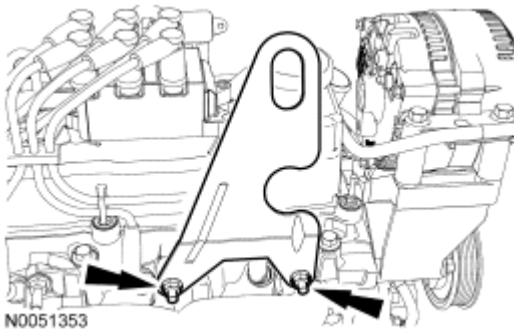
Locating RH Engine Lifting Eye & Nuts
